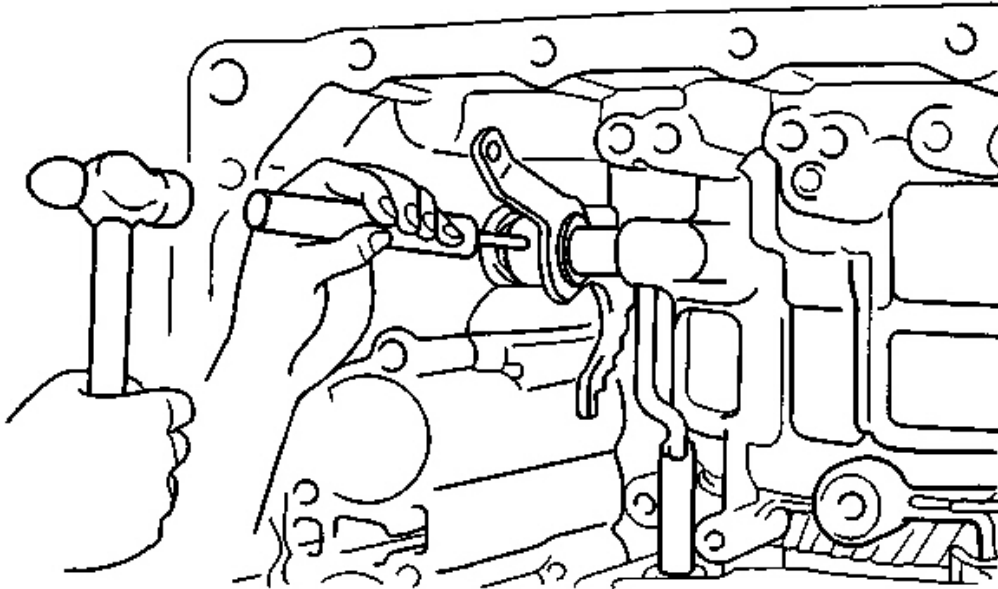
Driving The Pin Using A Pin Punch & Hammer
